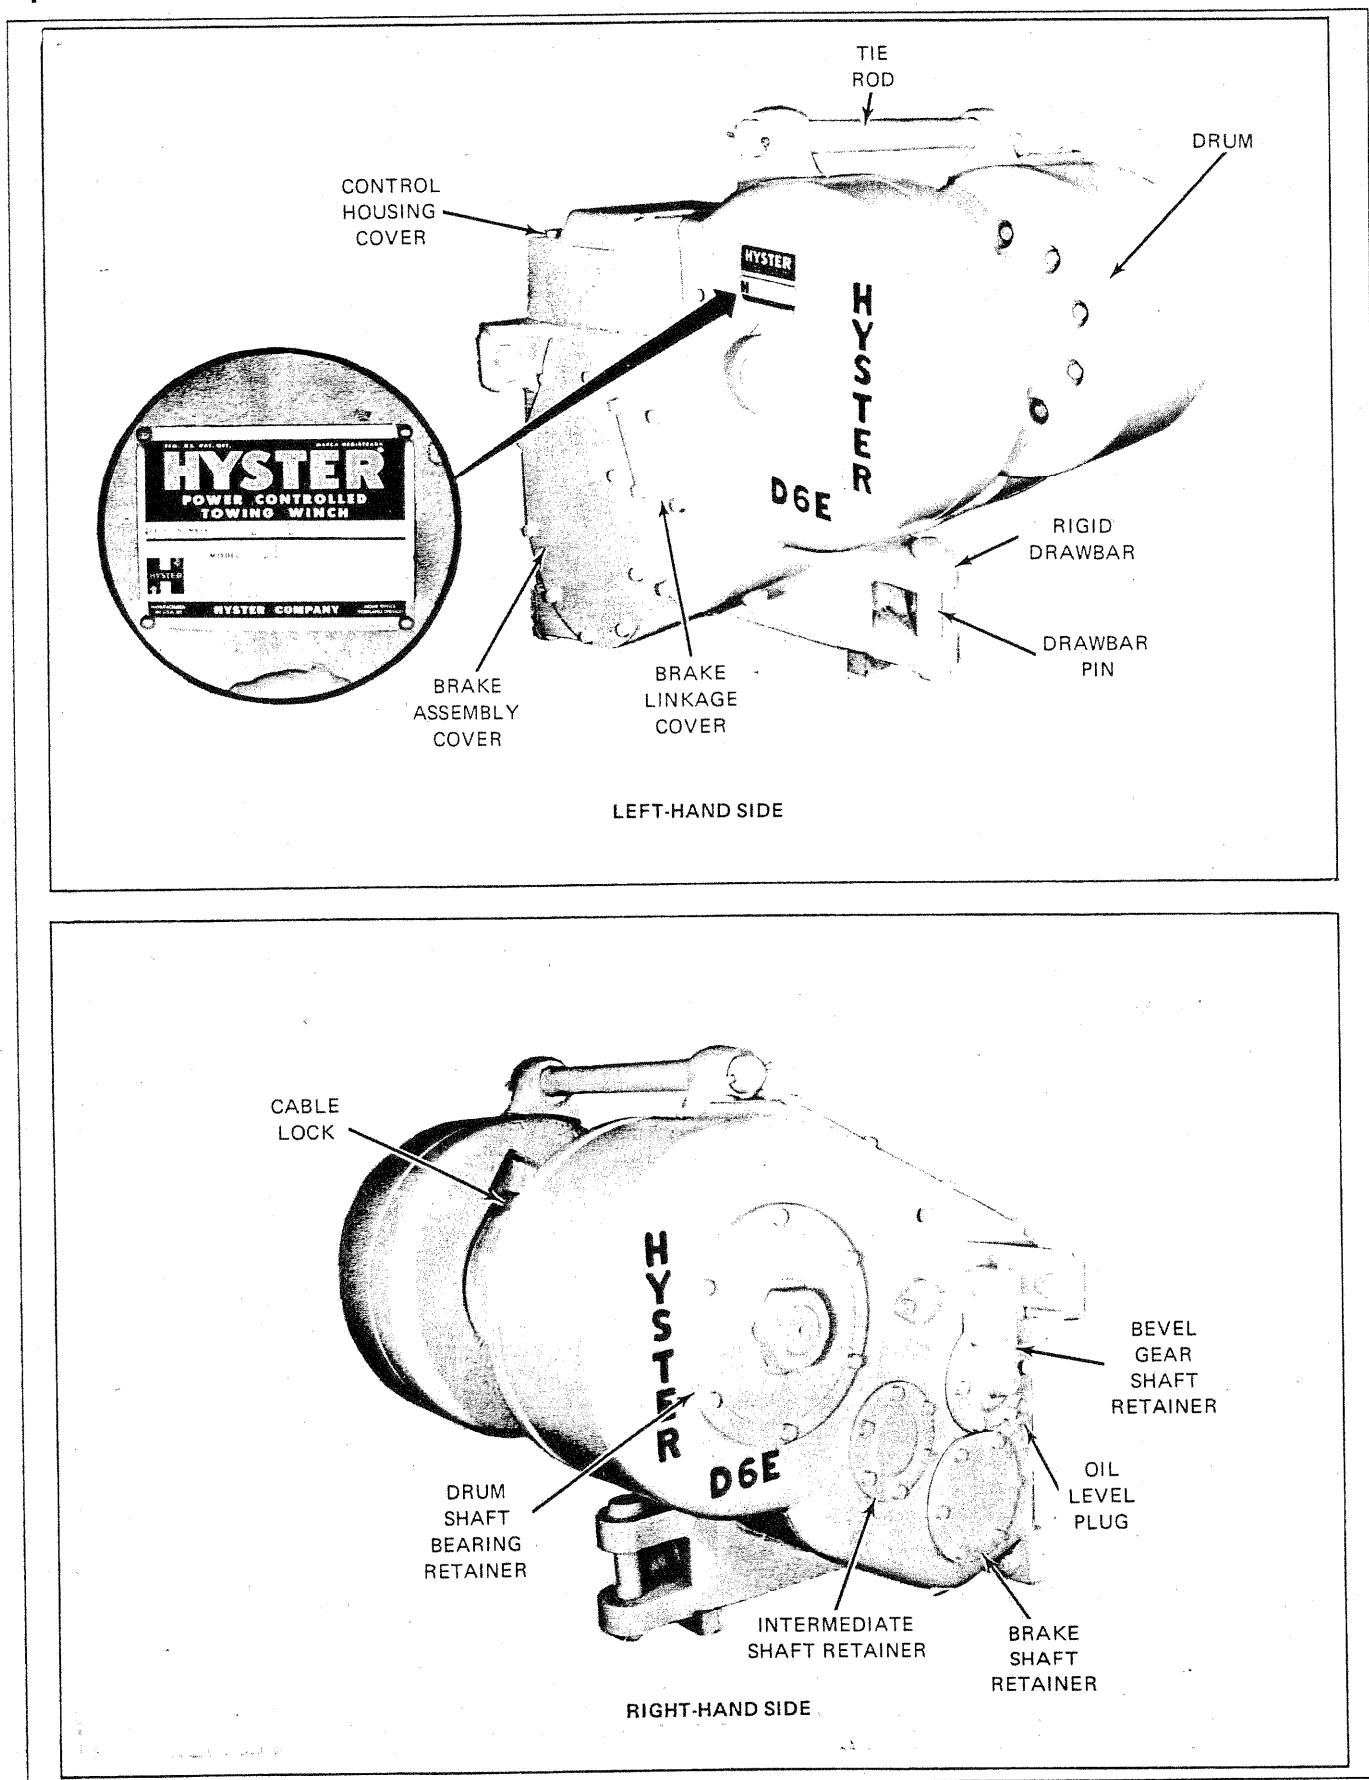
D6E TOWING WINCH (Sheet 1 of 2)
